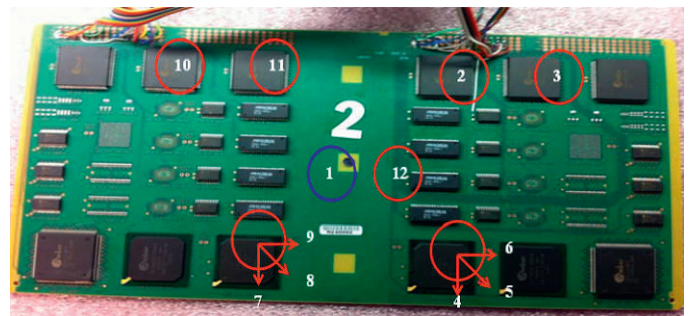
Batches 2 and 5. Blue indicates strain gauge on top side; red indicates strain gauge on bottom side.
